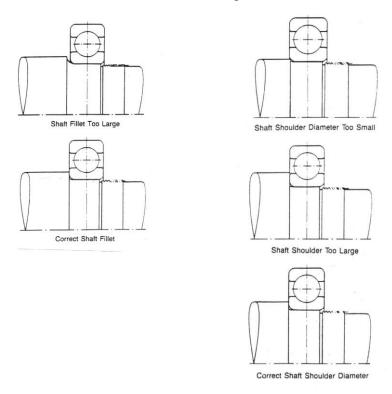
Incorrect and correct bearing mounting (Courtesy of SKF).
